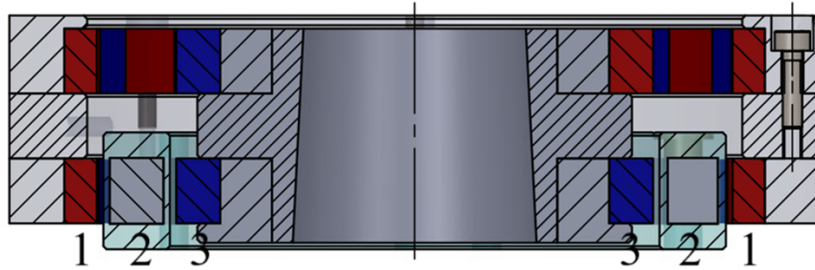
Assembly of the active part of the PMG engaged in the first gear: ring rotor (1), carrier stator (2), sun rotor (3)
